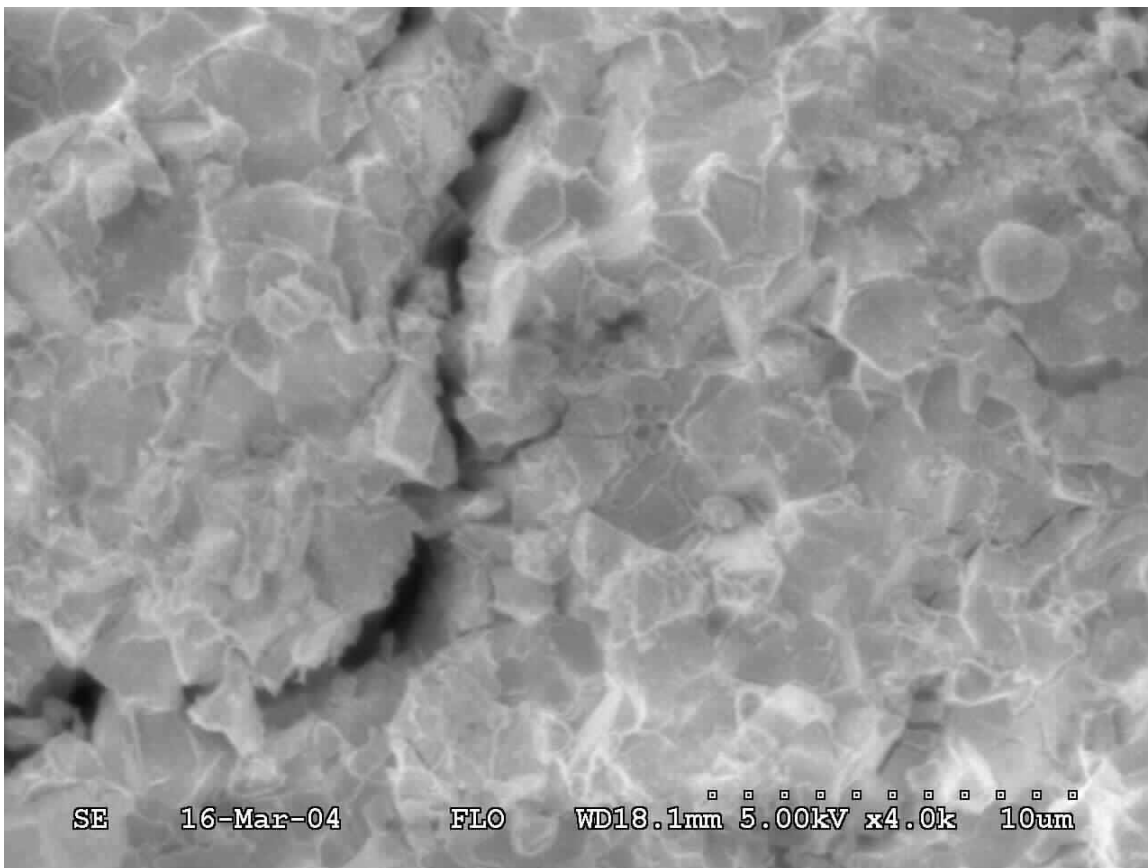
Fracture surface with crack. (LOT ...-00)
